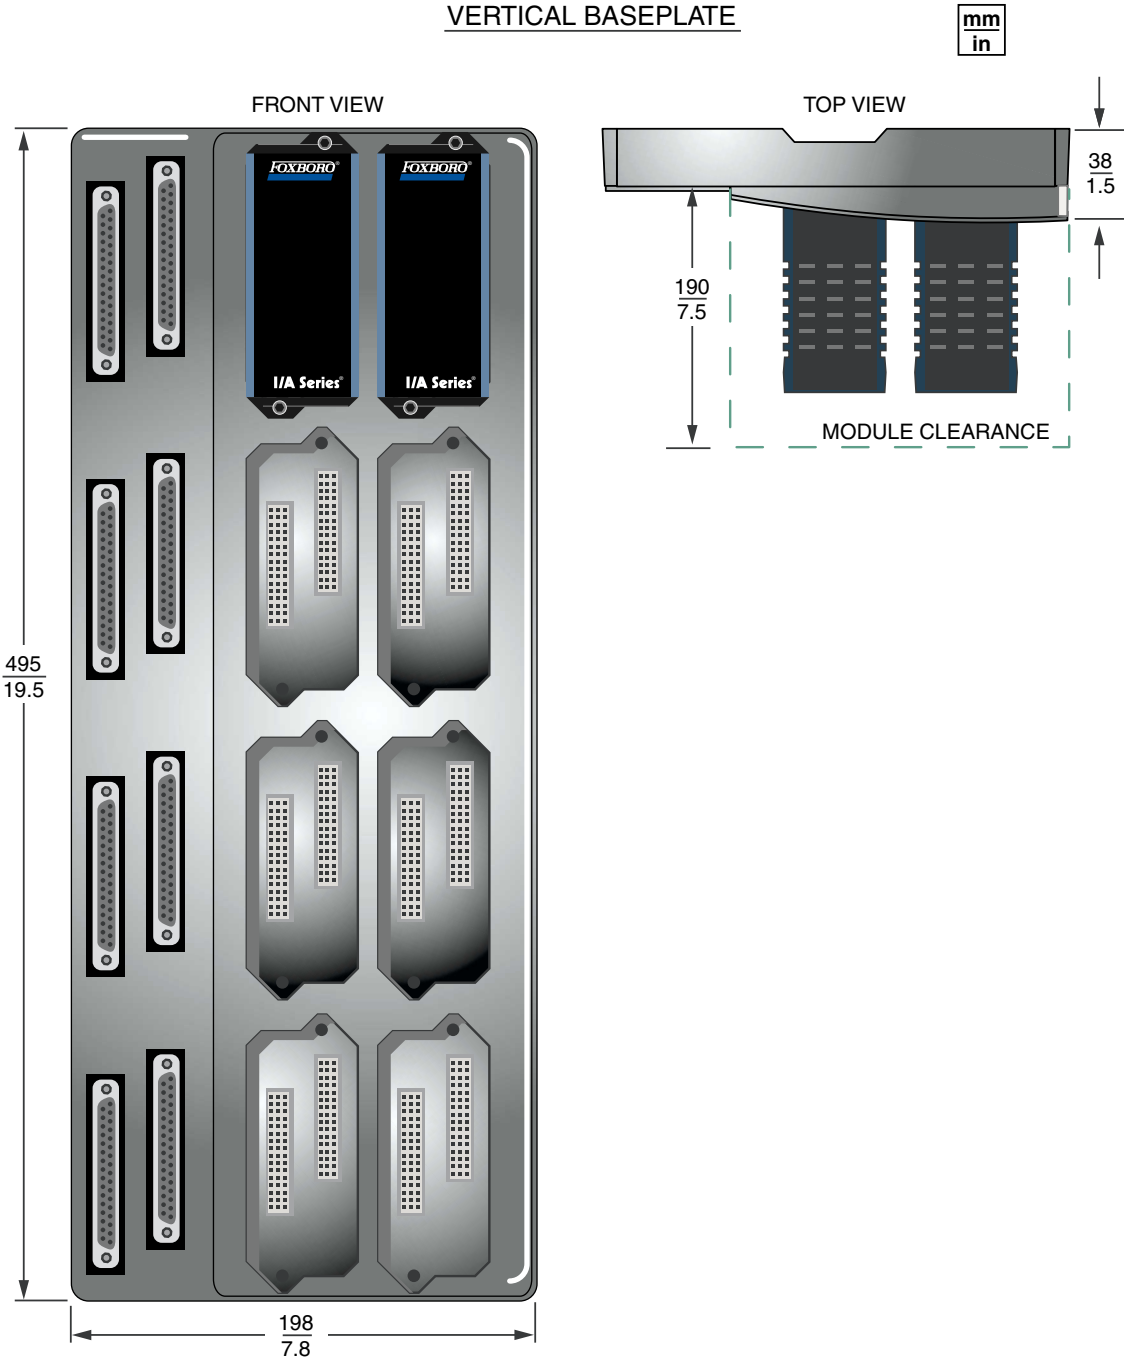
Baseplate Dimensions for Vertical DIN Rail Mounting
